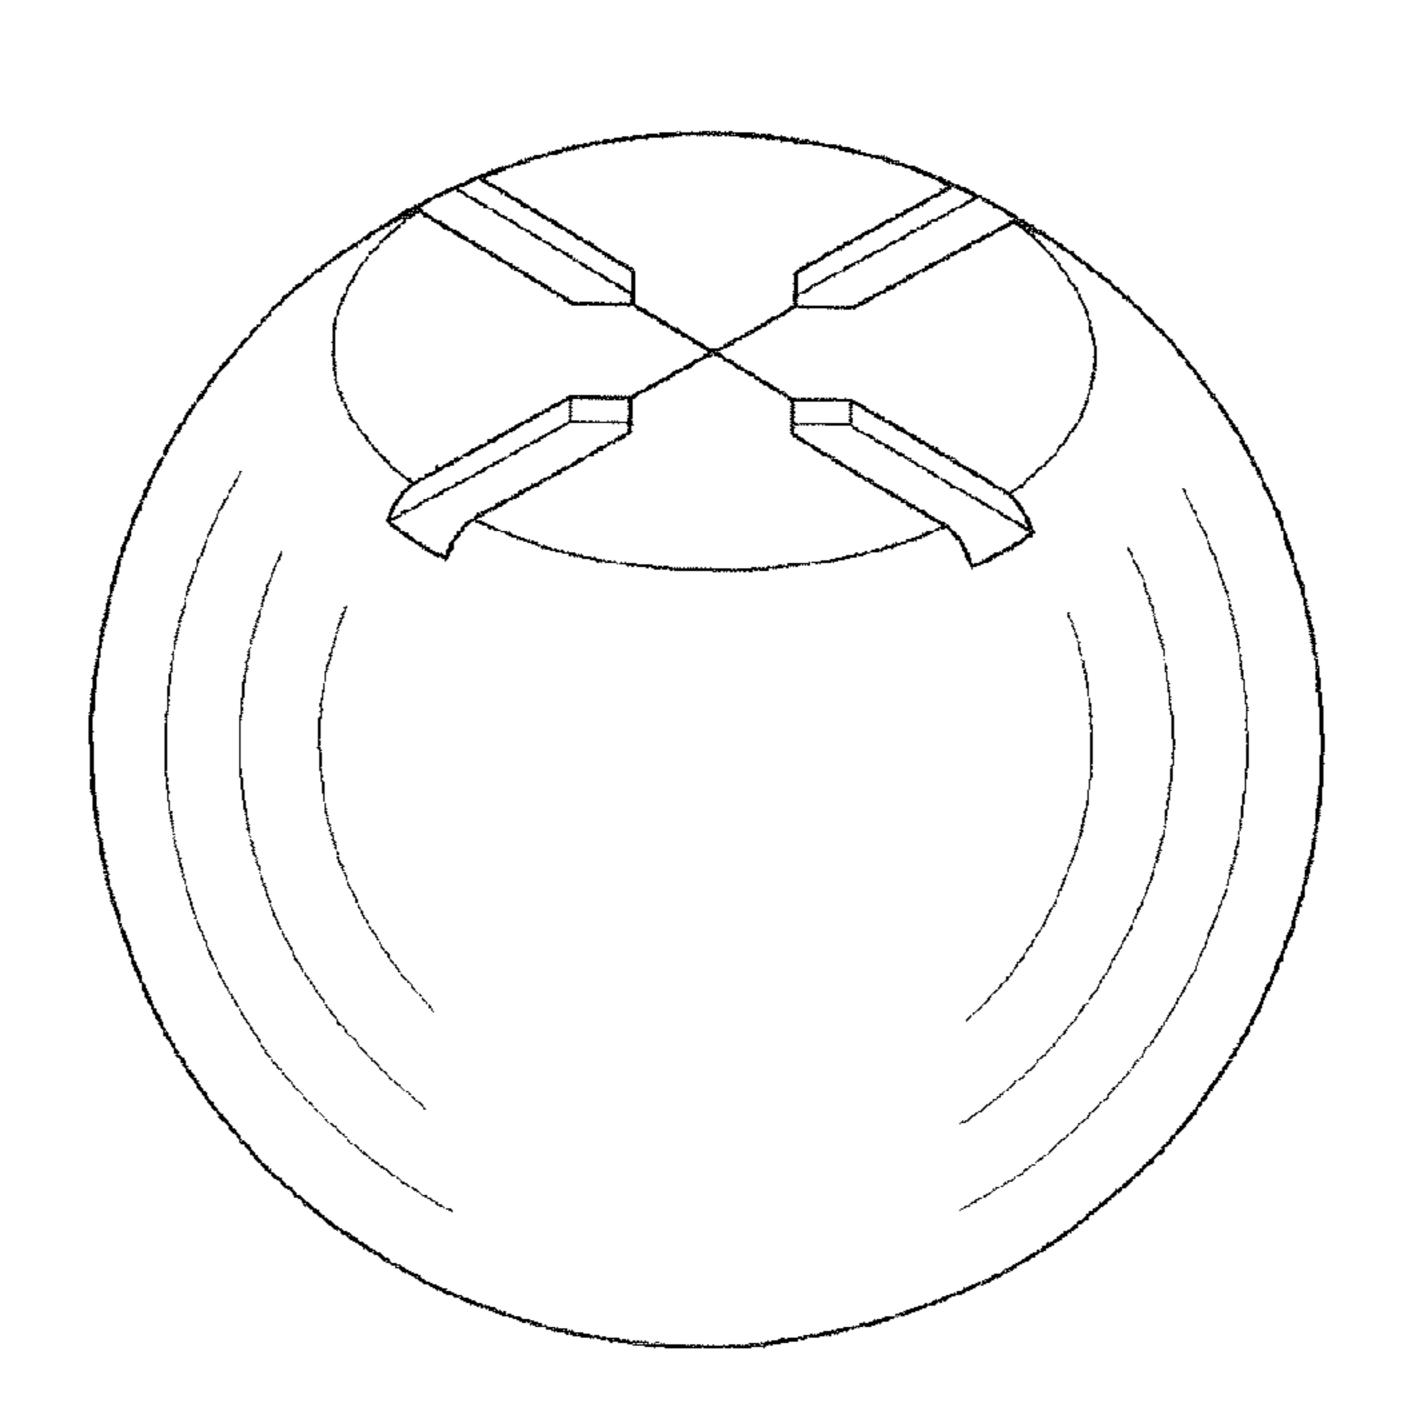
is a perspective view showing multiple reference members in an optical three-dimensional measuring machine; and,
